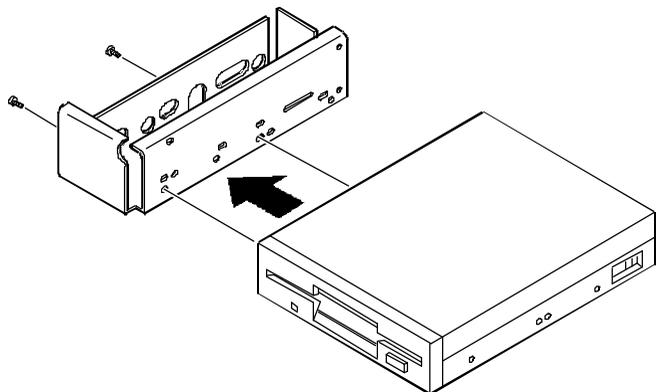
16 Removing 3.5 Inch Device from the Metal Face Plate
